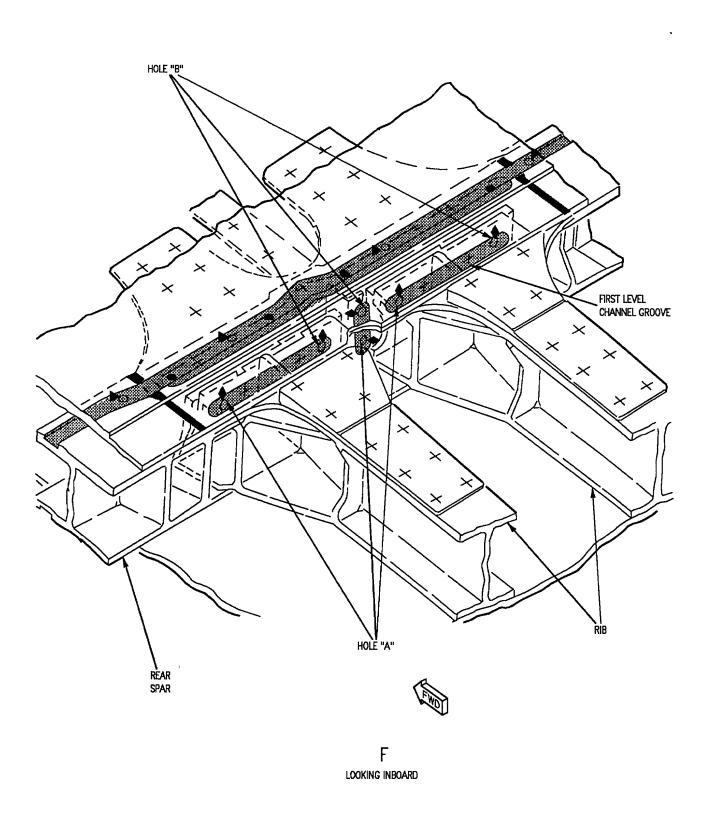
Rear Spar Channel Groove Seal Injection (Sheet 6)
